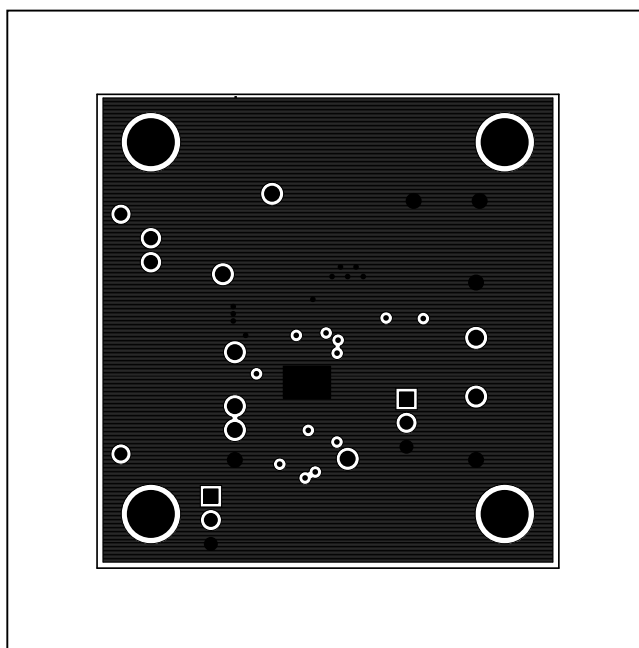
MAX16936 EV Kit PCB Layout—Layer 2
